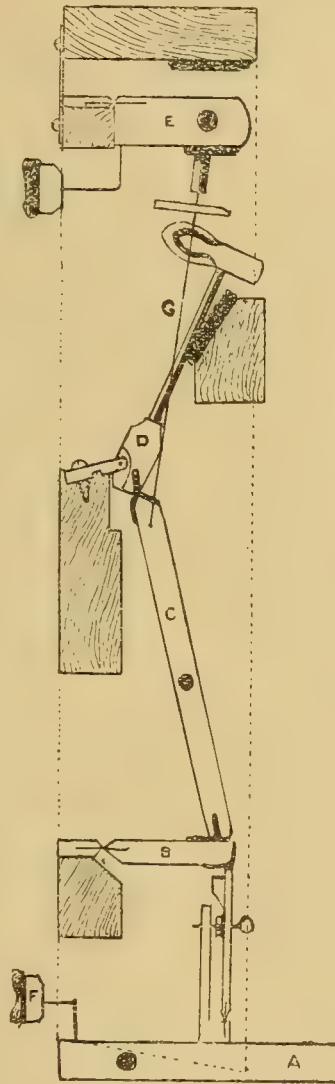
DAMPER IN ELEVATION AND SECTION—FULL SIZE.
